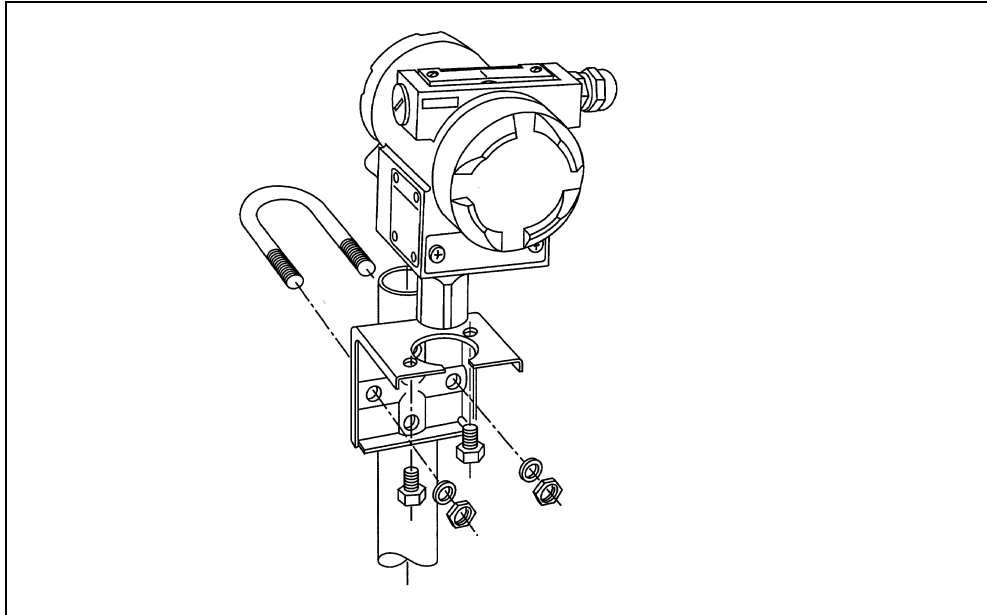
Mounting the SITRANS P, DS III series transmitter with mounting bracket
